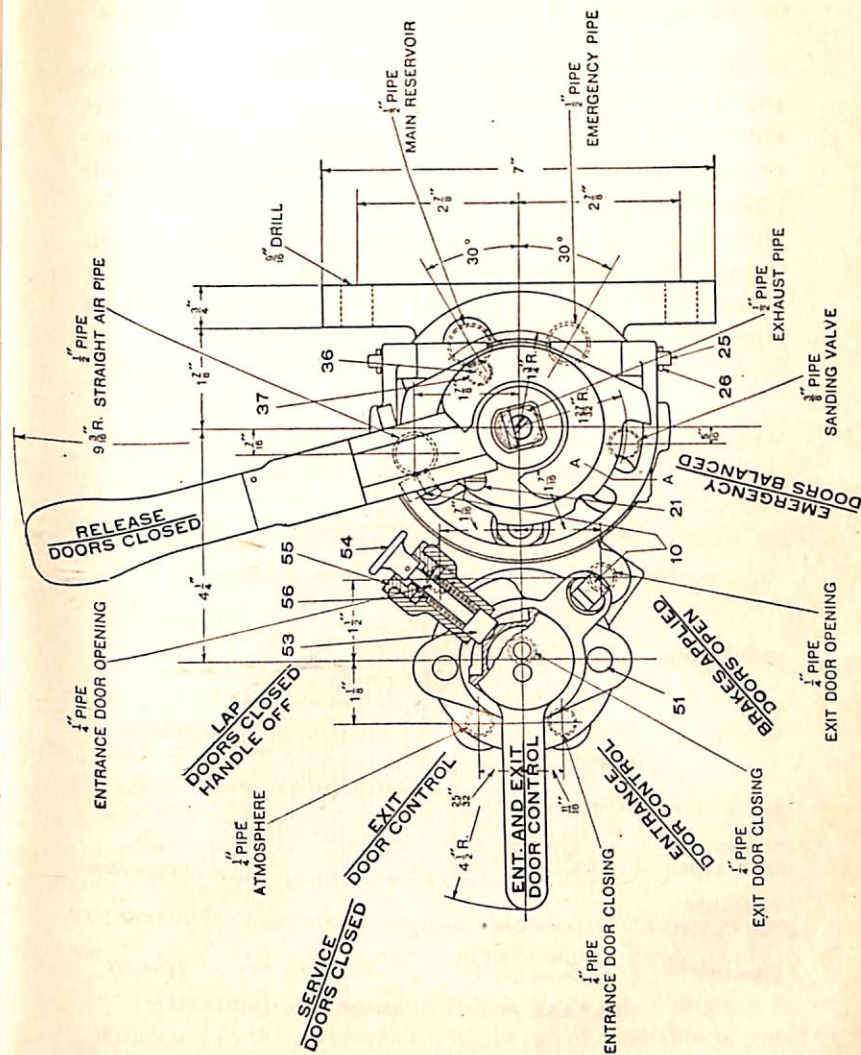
Plan View of the M-28 Brake Valve with Selector Valve
